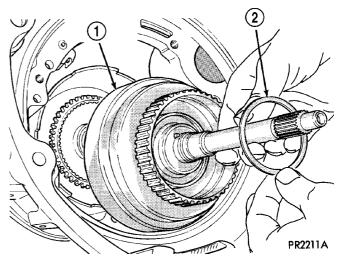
No. 2 Thrust Washer and Rear Clutch
